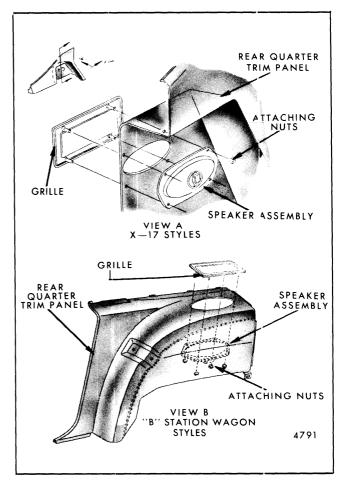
Rear Speaker Installation - "35, 45 and X-17" Styles
